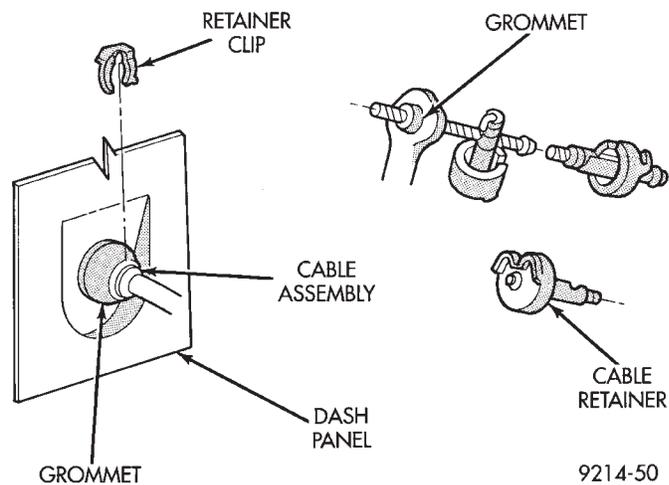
Accelerator Pedal and Throttle Cable—Rear View
